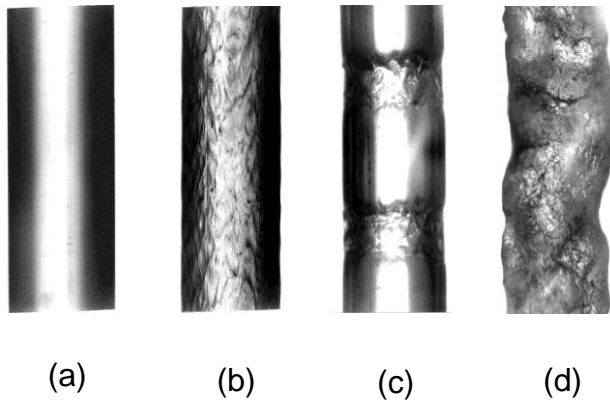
Typical extrudates showing (a) smooth surface (b) sharkskin melt fracture (c) stick-slip melt fracture and (d) gross melt fracture (Rosenbaum, 1998).
